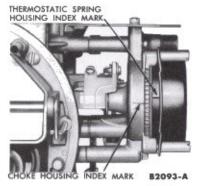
Automatic Choke Thermostatic Spring Housing Adjustment
